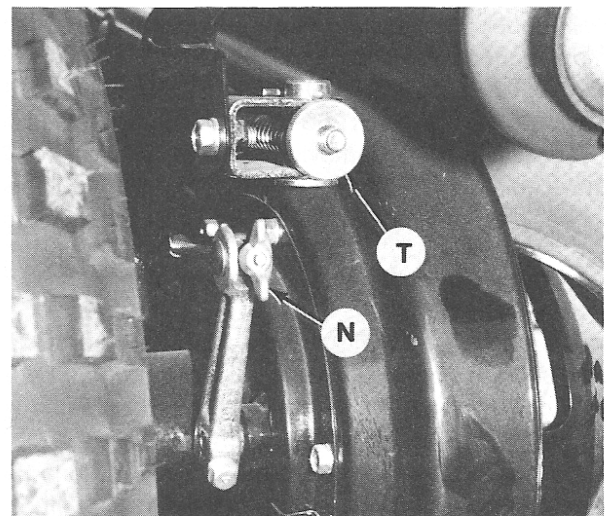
Rear brake pedal free travel is adjusted by rotating nut (N) while drive chain tension is adjusted by rotating nut (T).
